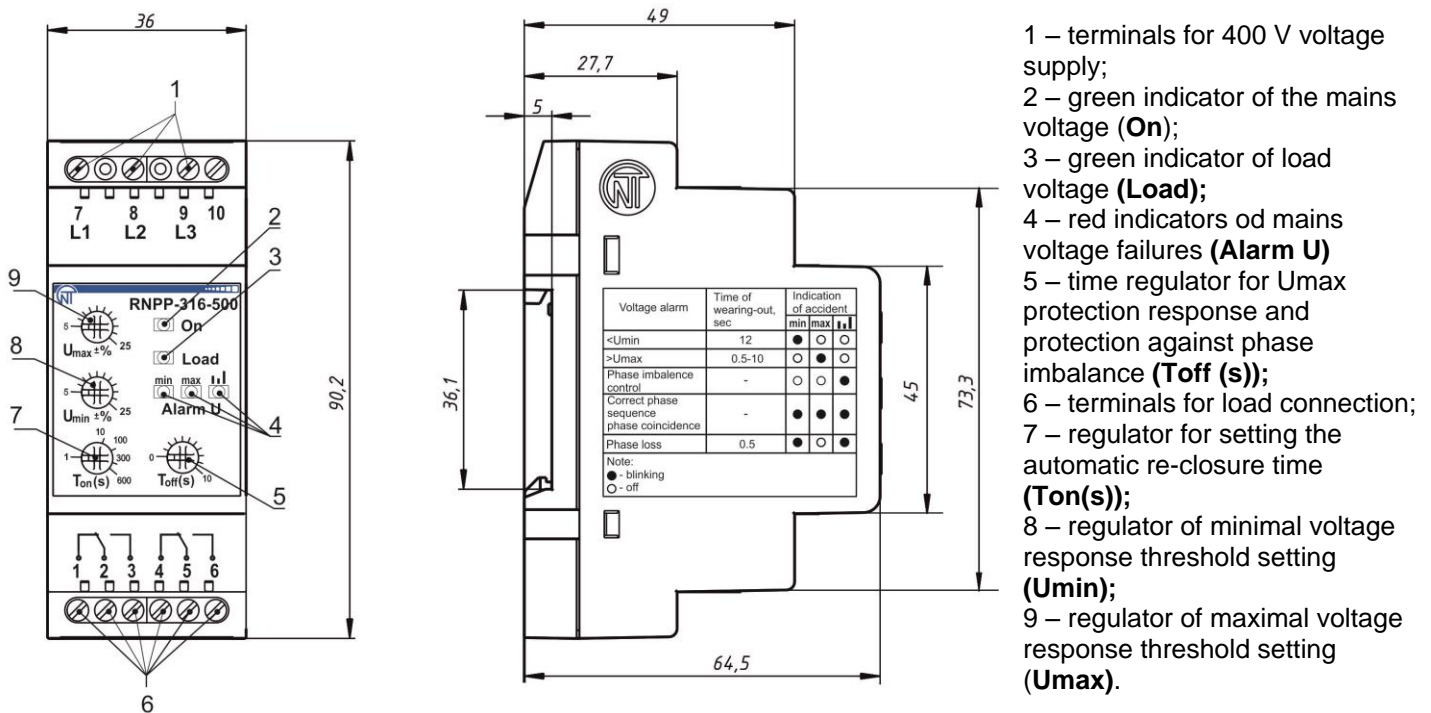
Controls, overall and mounting dimensions of RNPP-316-500
